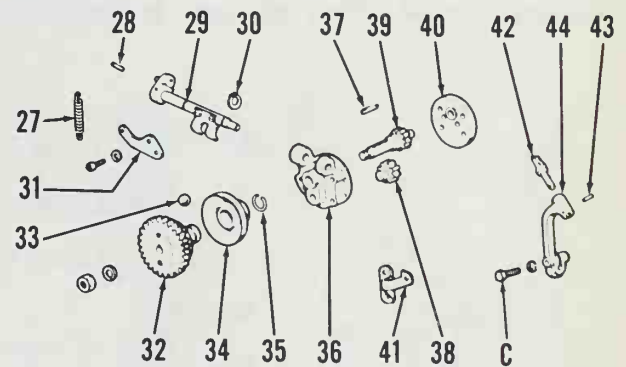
Exploded view of camshaft, balancer and cam follower assemblies.
